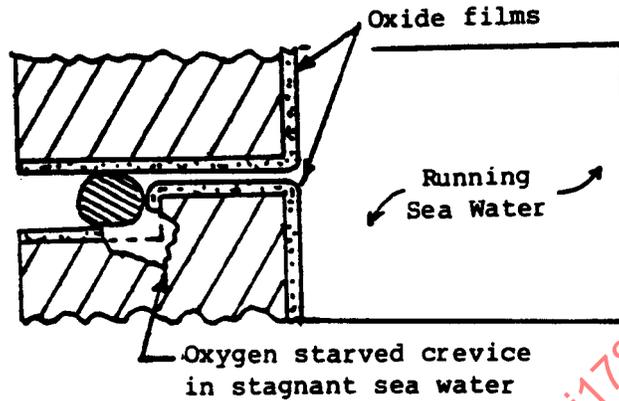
CREVICE CORROSION OF STAINLESS STEEL AT AN O-RING SEAL IN SEA WATER
